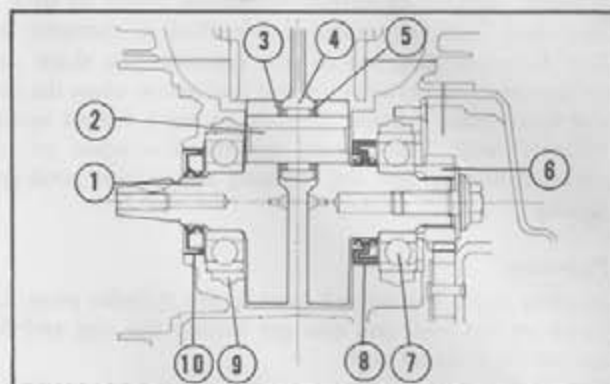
① Crankshaft ② Crankpin ③ Side plate ④ Connecting rod ⑤ Side plate ⑥ Primary drive gear ⑦ Ball bearing ⑧ Oil seal ⑨ Ball bearing ⑩ Oil seal
